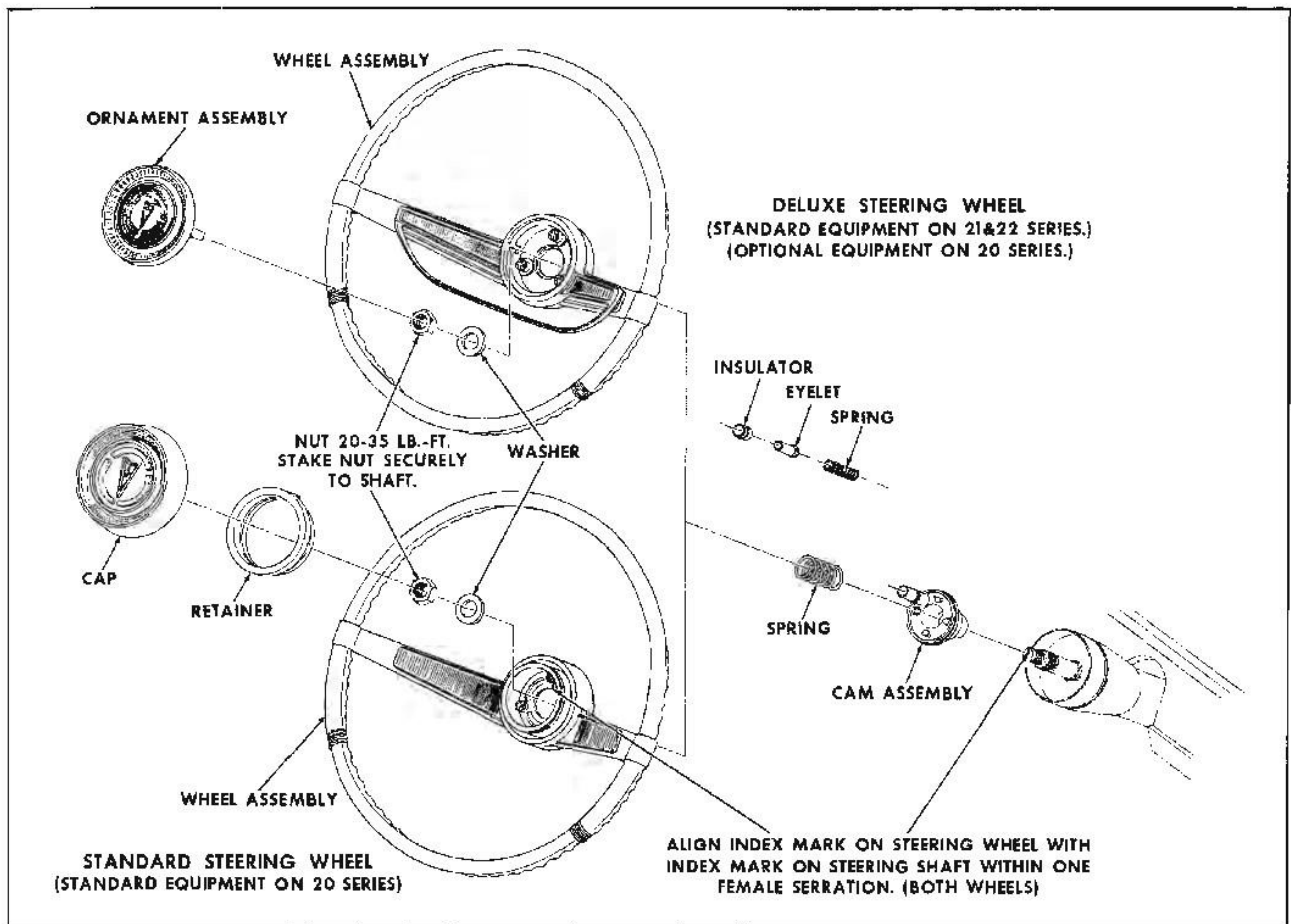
Steering Wheel and Horn Button - Exploded View
